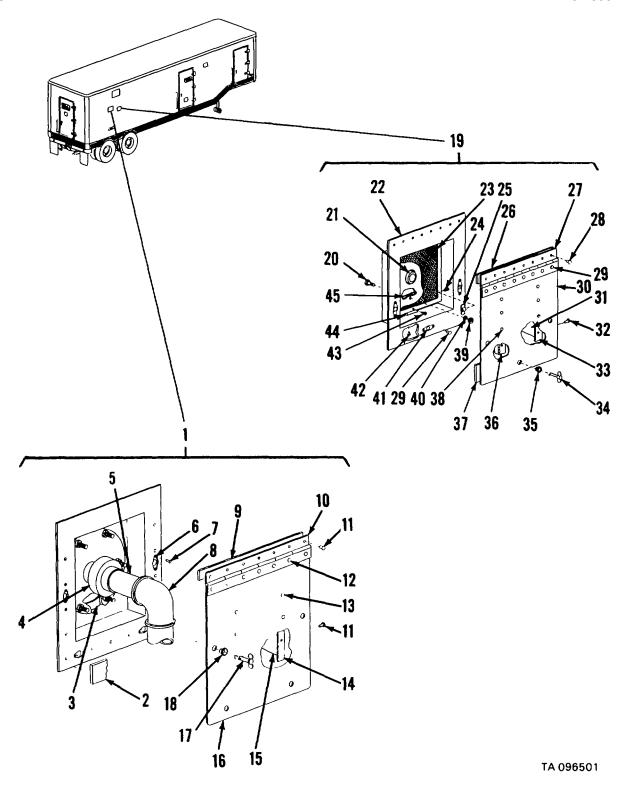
Exhaust outlet assembly, knock engine breather assembly, XM822.
